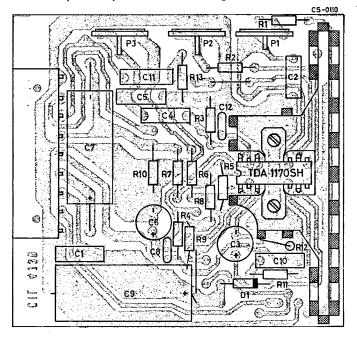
P.C. board and component layout of the circuit of fig. 6 (1:1 scale)
